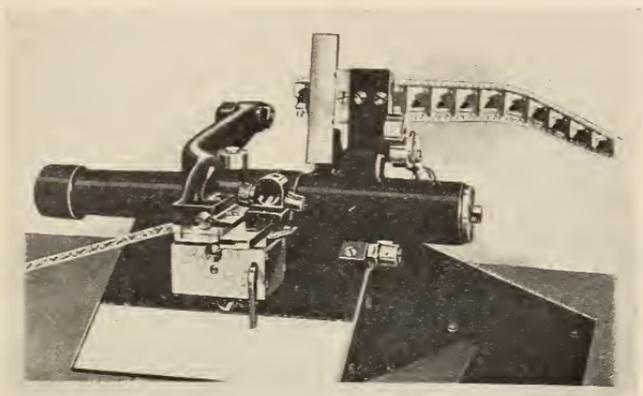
Splicing mechanism of Automatic Positive Splicing Machine.
